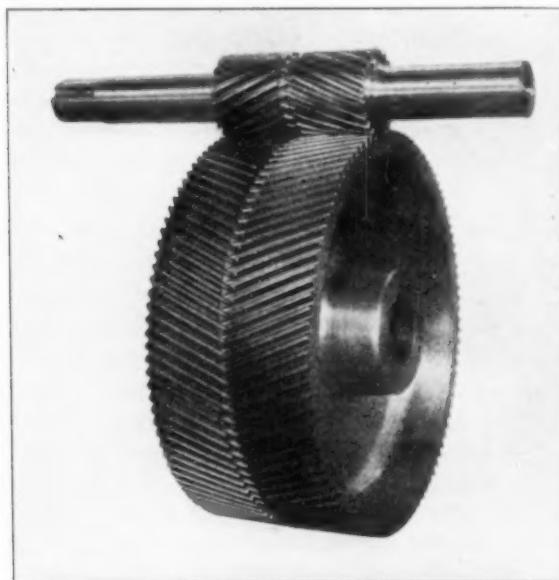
GEAR AND PINION FOR 200-H.P. TURBINE, TO RUN AT 5000 FT. PER MIN.
